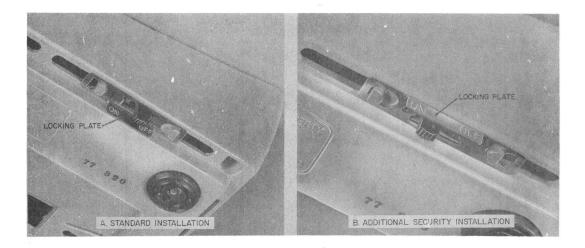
Optional Methods of Installing Locking Plate of D-180812 Kit of Parts
